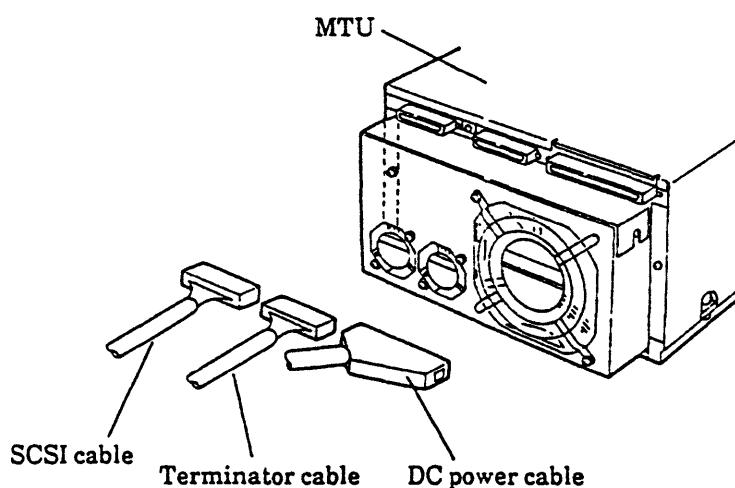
Remount 19-inch rack (with drive and Power Supply) (1/2)
